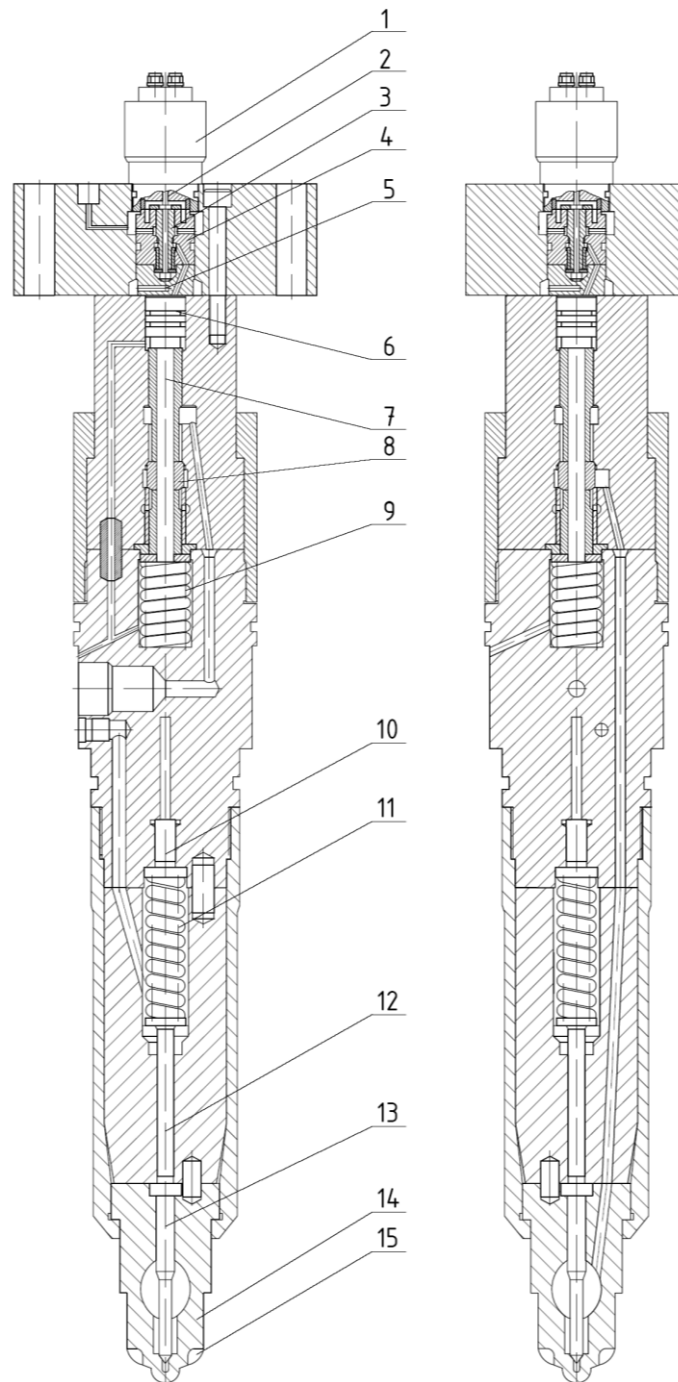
Fuel injector with electromagnetic control of fuel supply:
